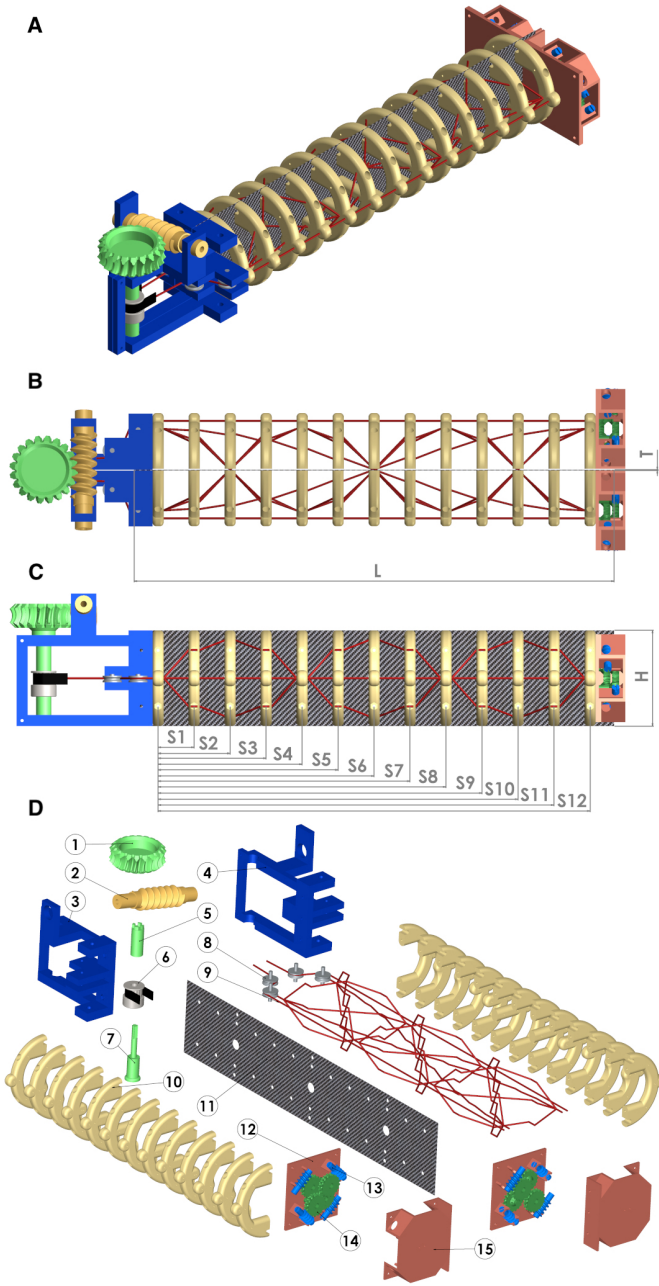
A. Isometric view (assembled). B. Top view (assembled). C. Side view (assembled). D. Exploded view. ① Worm gear ② Worm ③ Base frame - right ④ Base frame - left ⑤ Supporting shaft ⑥ timing pulley and belt ⑦ Supporting shaft - lower ⑧ tendon routing pulley ⑨ tendons ⑩ tendon supports ⑪ Backbone ⑫ Tensioner housing ⑬ Tensioner worm ⑭ Tensioner gear ⑮ Tensioner clamp
